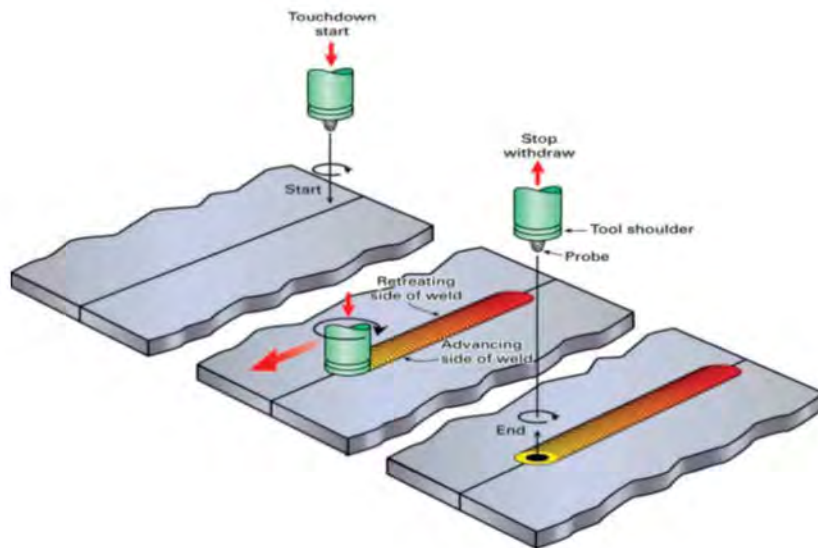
THE GENERAL PRINCIPLE OF FRICTION STIR WELDING
